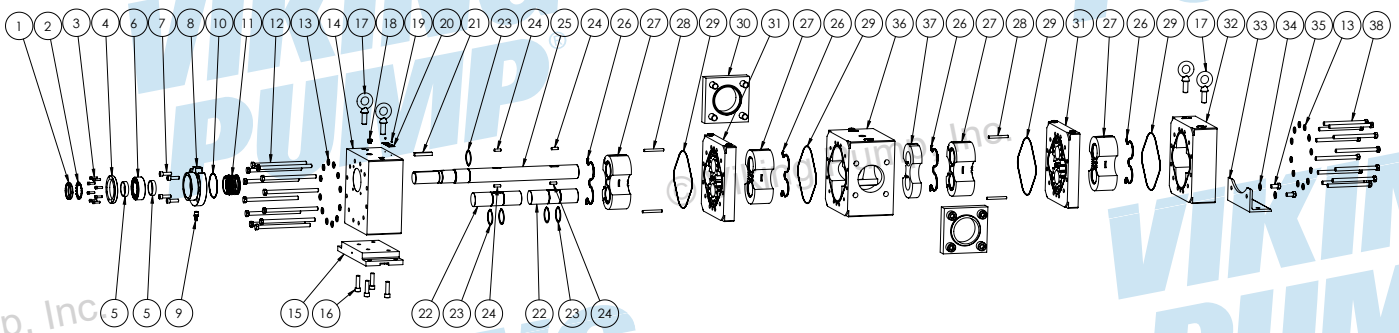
EXPLODED VIEW - GB-425021 & GB-425051 TYPE 2 MECHANICAL SEAL PUMPS
